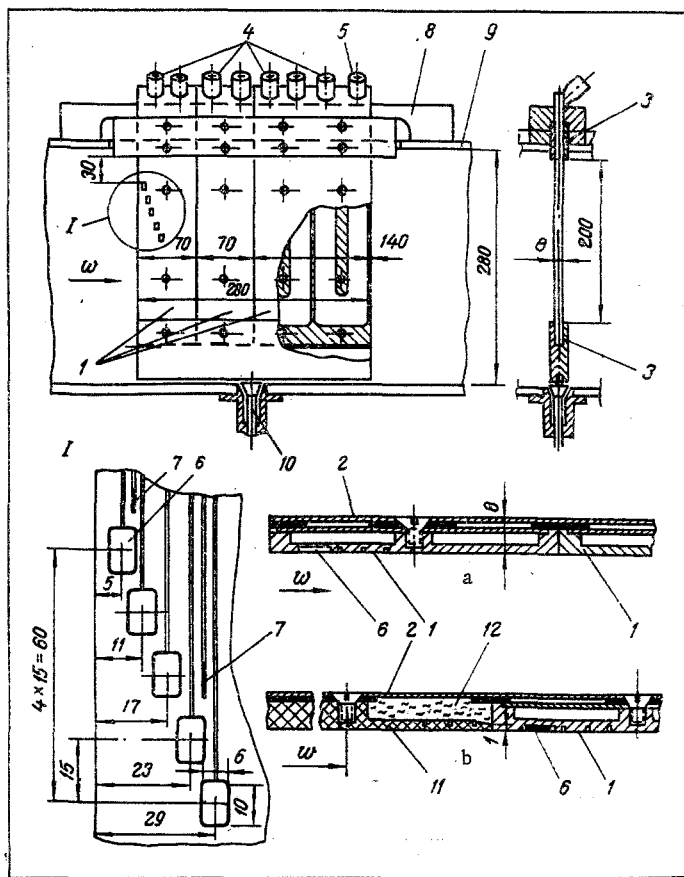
Construction of the plate: a) assembly of the fully-heated plate; b) assembly of the plate with heated initial section; 1) water-cooled sections; 2) base plate; 3) fittings; 4) tube for cooling water supply; 5) thermocouples for measurement of water temperature; 6) heat flux gages; 7) thermocouples for measurement of wall temperature; 8) bracket; 9) wind tunnel working section ceiling; 10) support rod; 11) plastic textolite strip; 12) loose wadding.
